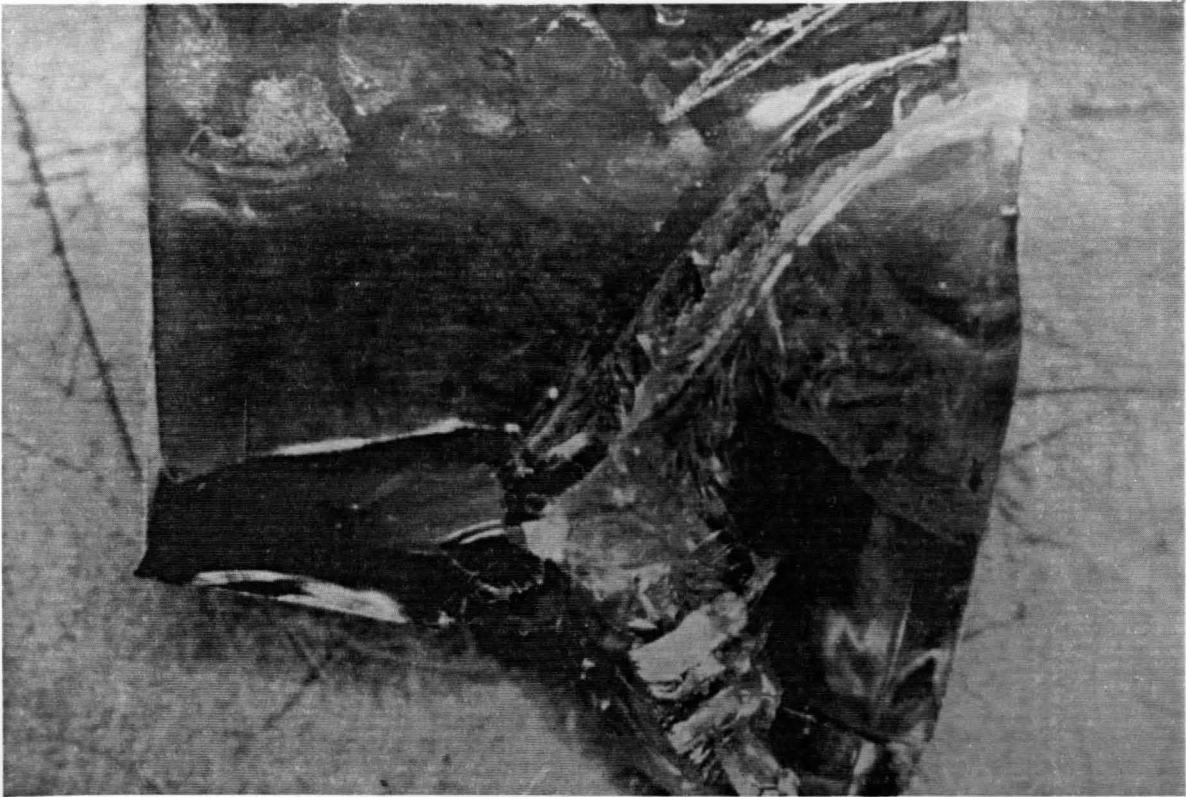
Stereomicroscope photograph of fracture surface in torsion with bending.
